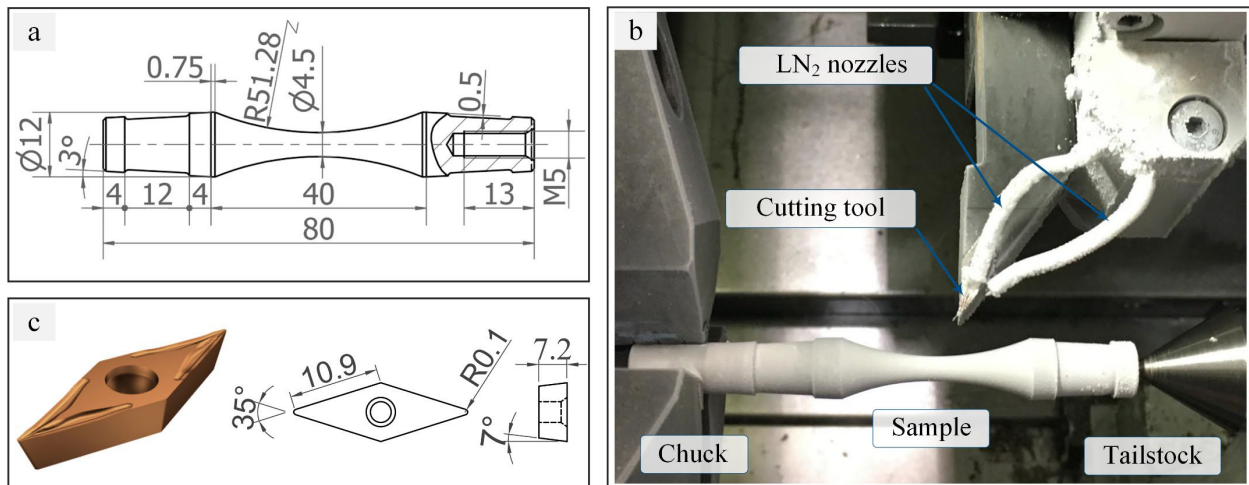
Geometry of the specimen for fatigue testing (a), machining set-up employing cryogenic cooling (b), geometry of the cutting tool (c).
